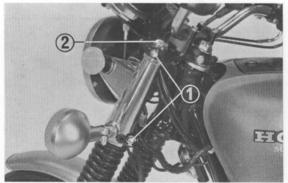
1 Front fork retaining bolt ② Front fork bolt
